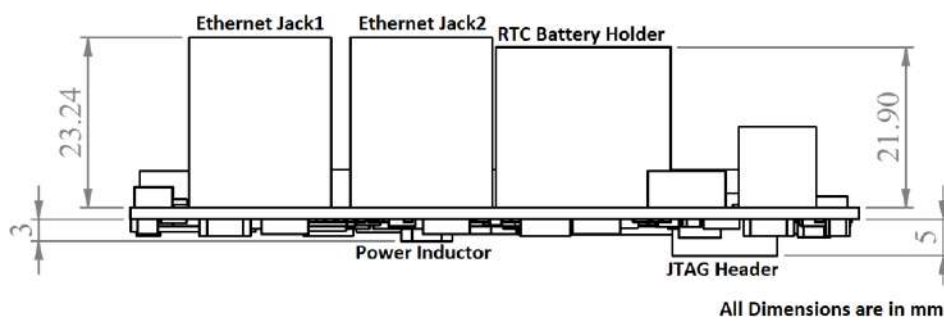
Mechanical dimension of i.MX6 SODIMM Carrier Board - Side View
